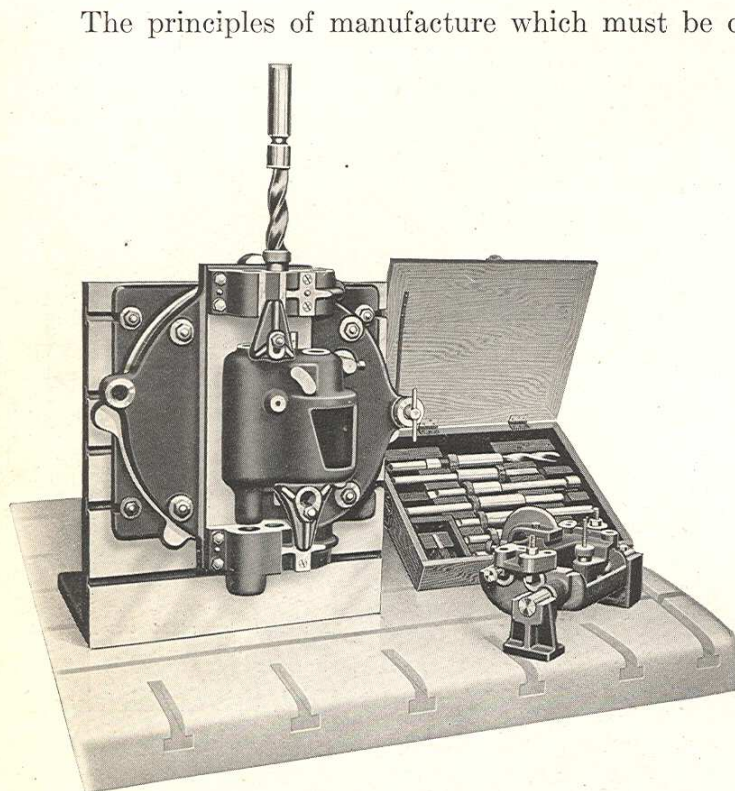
High Duty Lathe, Quick Change Gear Boxes being bored through a Jig on an "American" Radial Drill.
